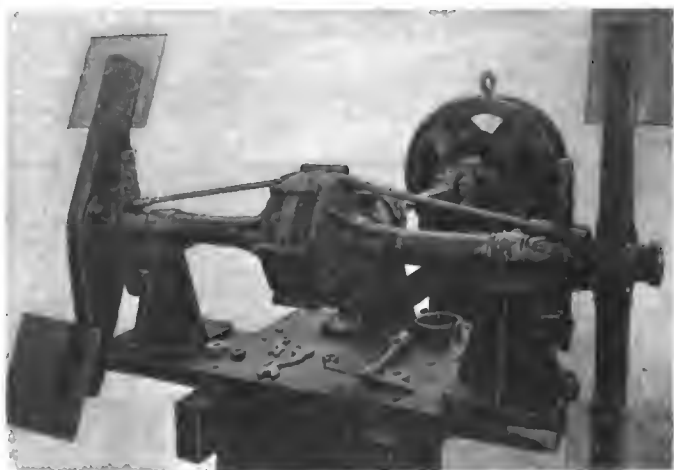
Testing a live rear axle after it is assembled to see if it will make noise, and to give it a test load
